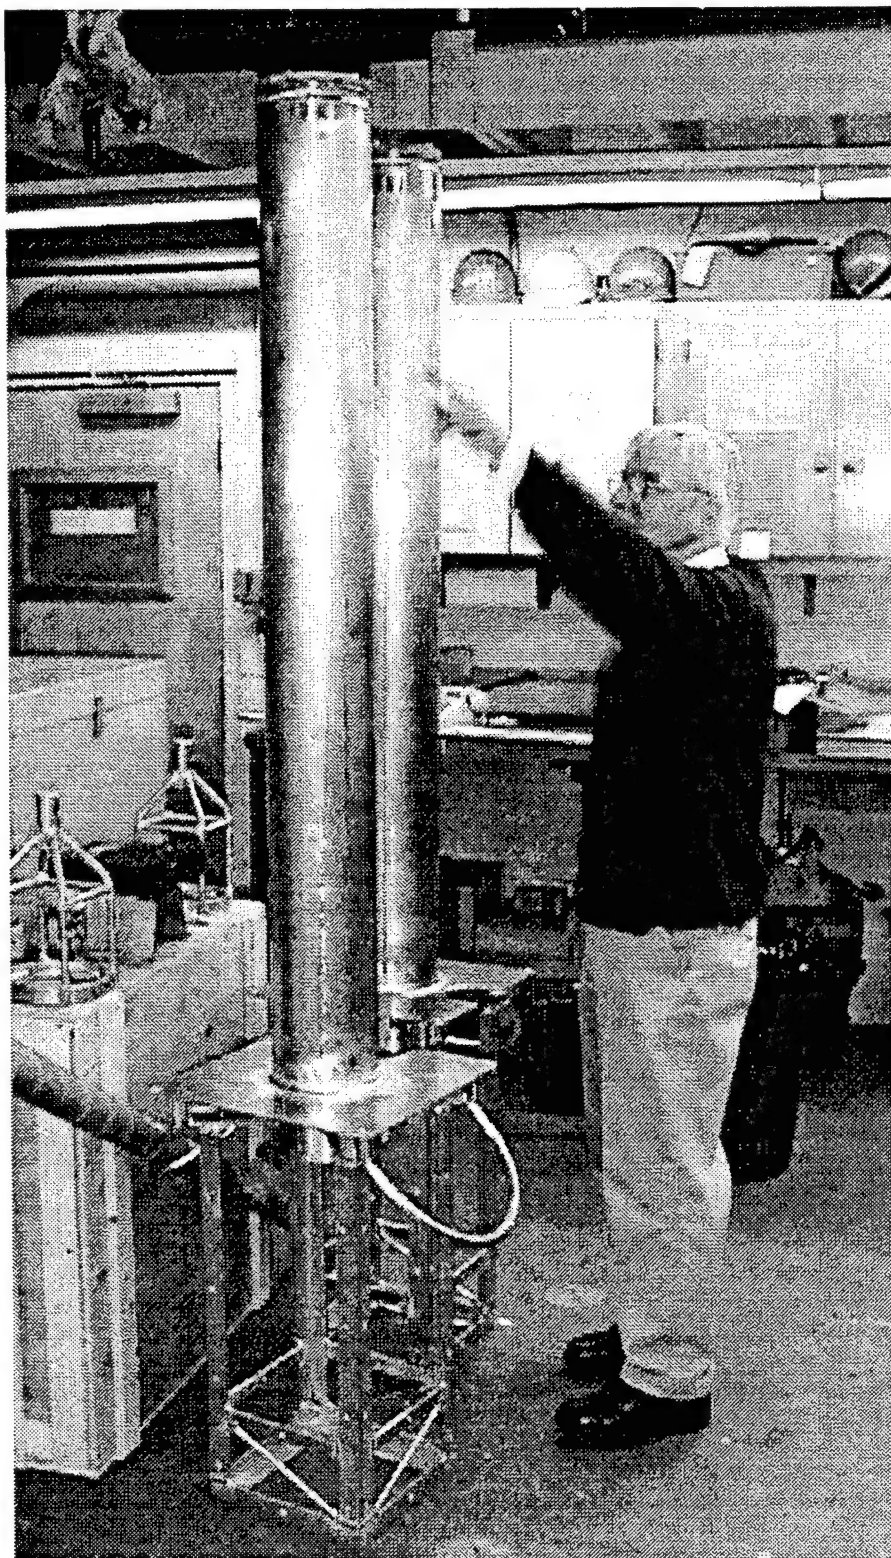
Walter Paul standing by two NOPP telemetry buoy pressure housings with towers (upside down) to give scale. The housings are fully machined/welded and ready for painting and assembly. The mooring brackets that attach to the bottom of the buoy and hold the end cap in place are seen on the box on the far left.
